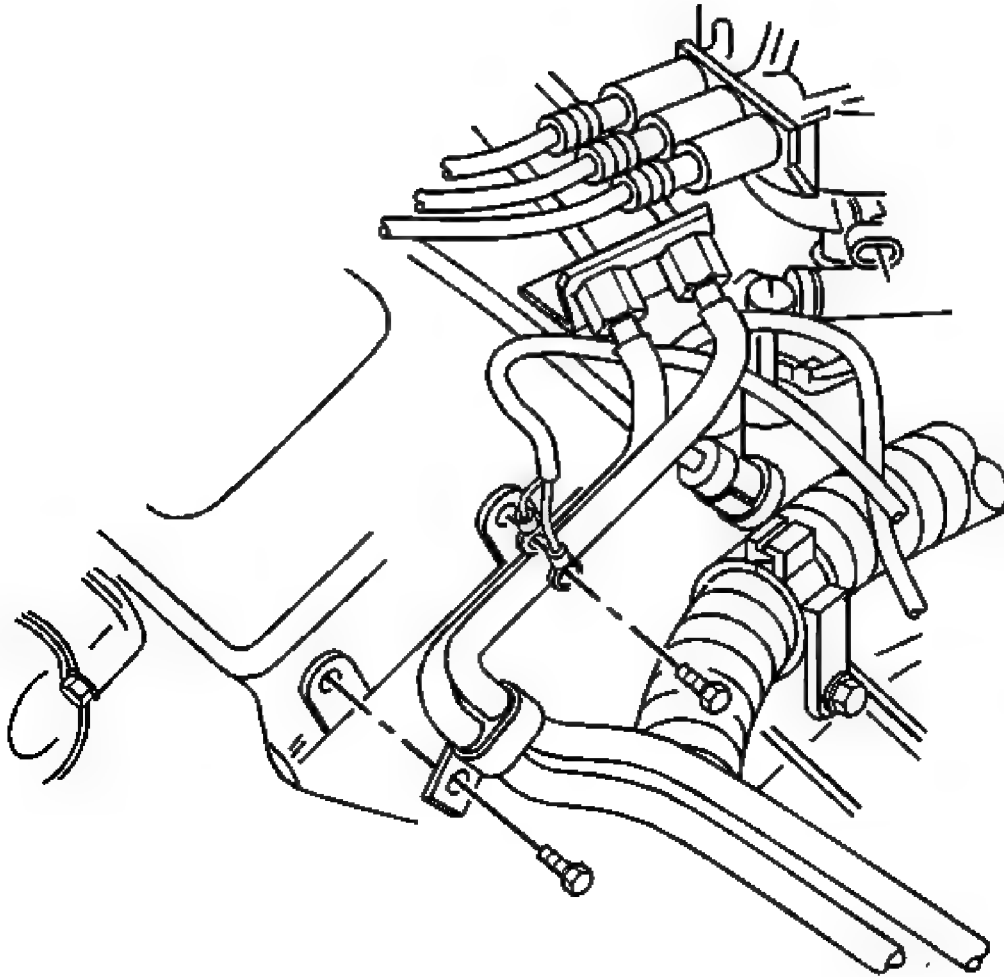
Locating Bolts For Ground Wire & Fuel Pipe Bracket
